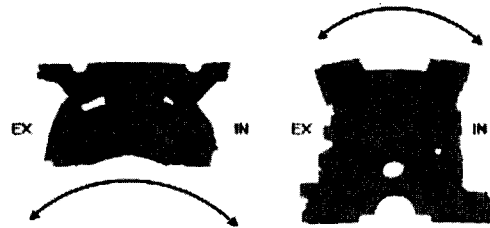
Deformed shape of cylinder head and block (Assembly load case)
